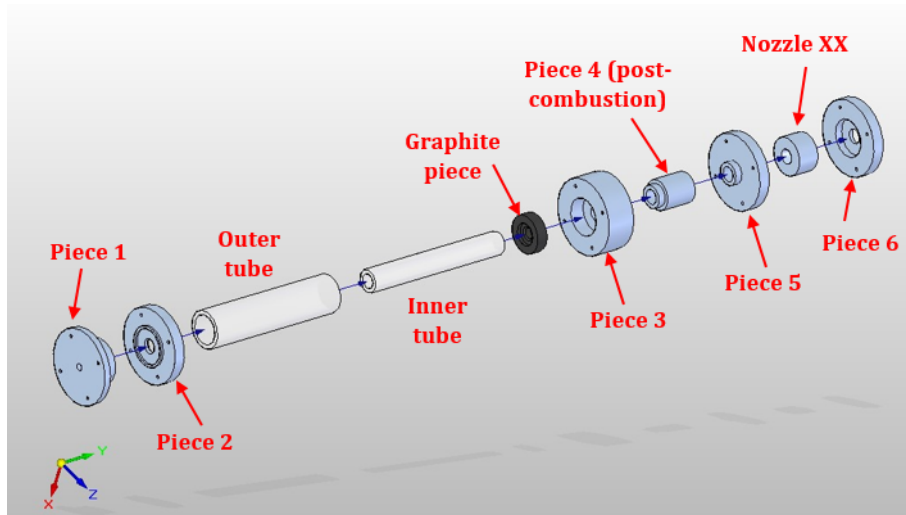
Exploded CAD view of the thruster assembly including the name of the parts
